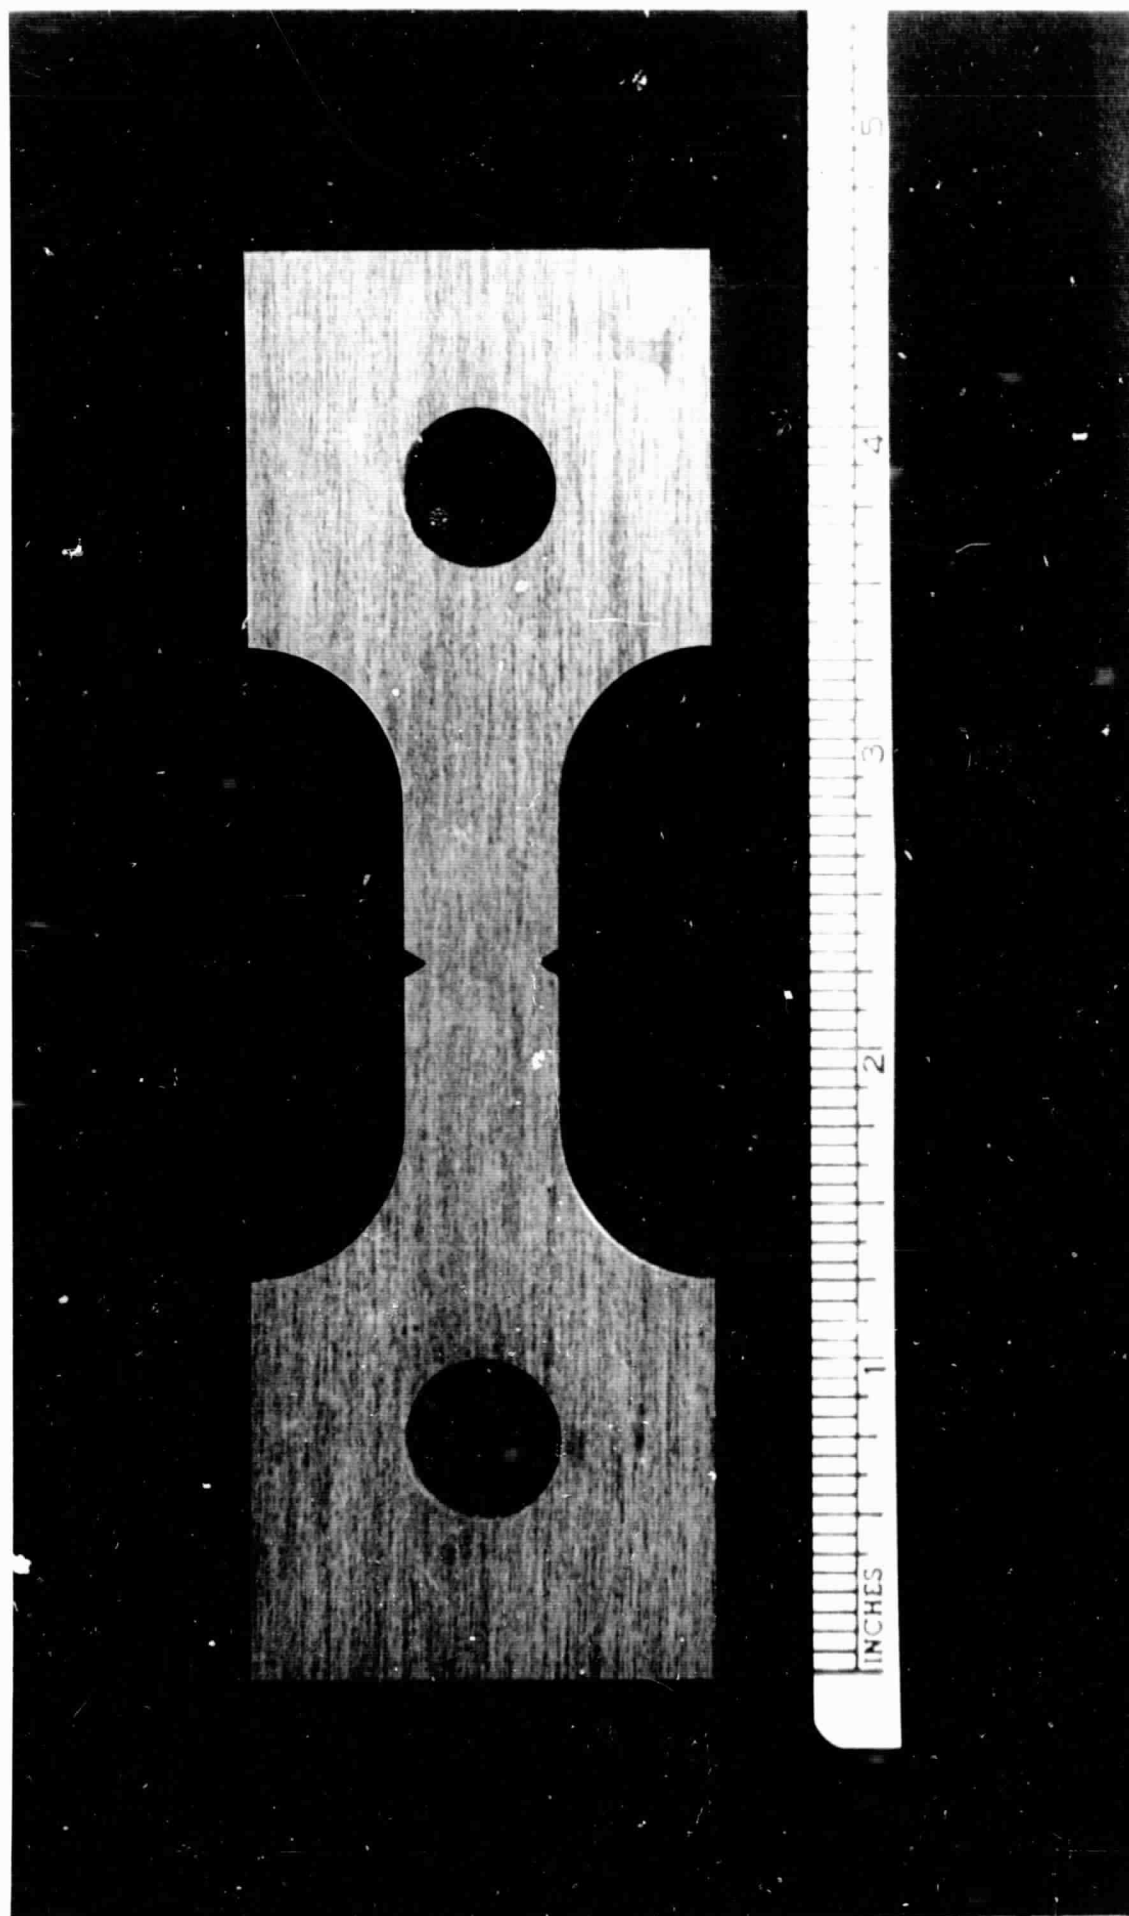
PHOTOGRAPH OF NOTCHED TENSILE SPECIMEN
